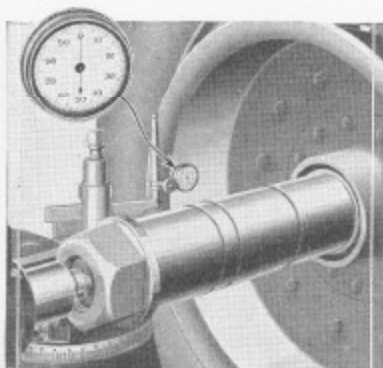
Testing the Accuracy of a Brake Drum Using a Dial Test Indicator.
